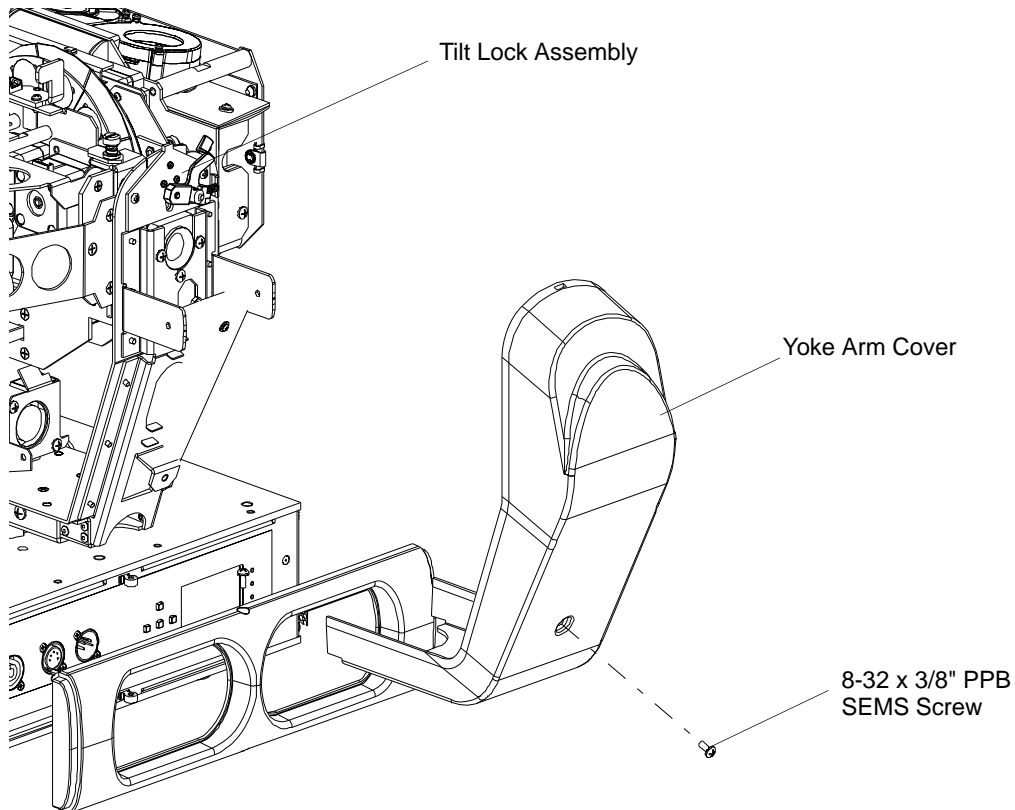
Tilt Lock Side Yoke Arm Cover Removal
